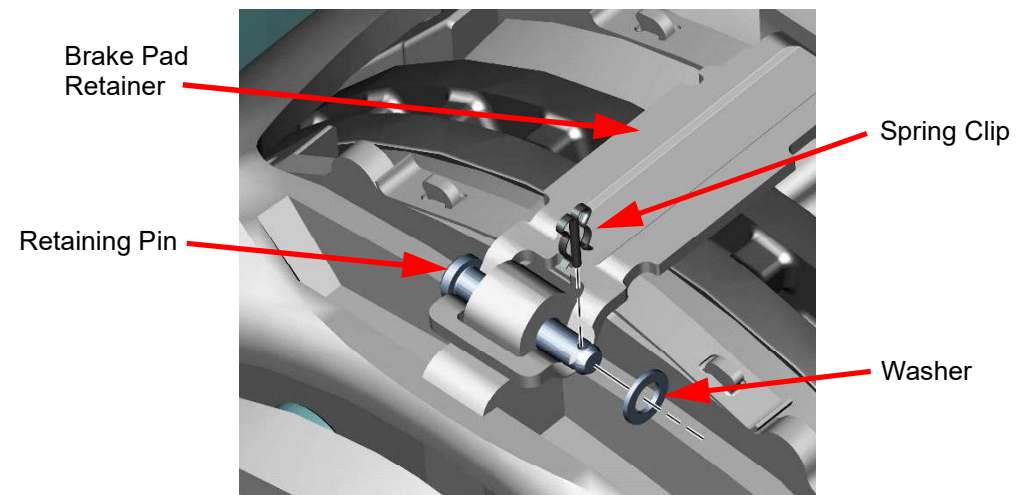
Installing the Retaining Pin, Washer, and Spring Clip
